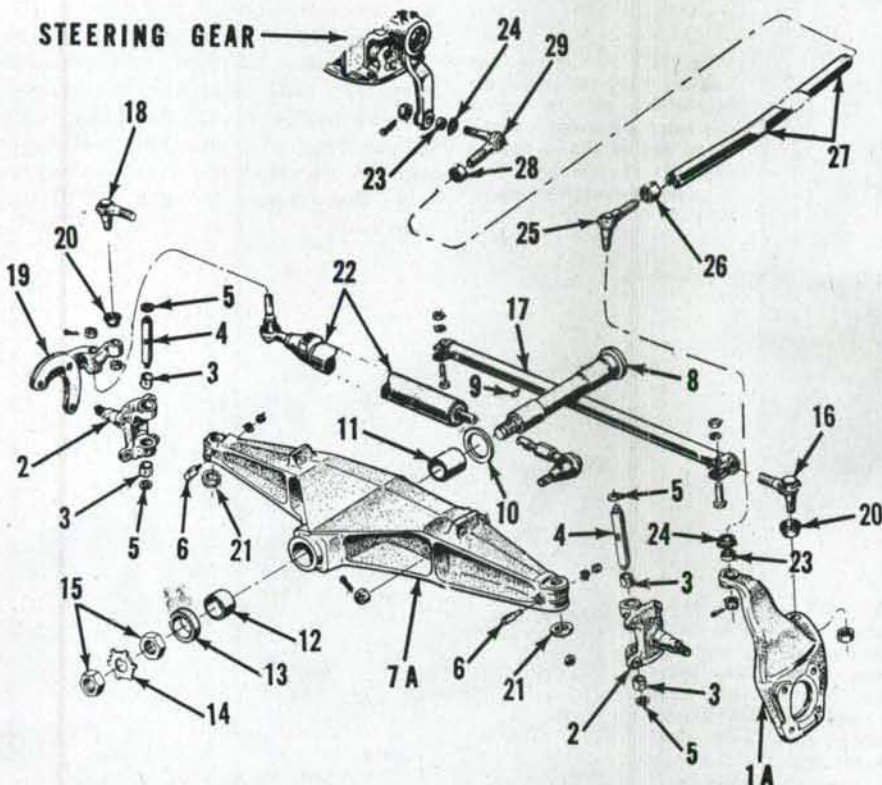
Exploded view (from rear) of front axle assembly used on early Heavy Duty Industrial tractor with full power steering.
